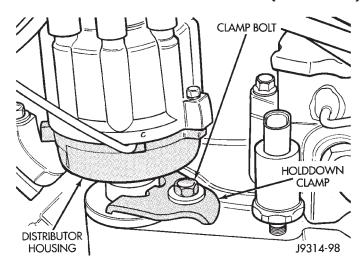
Distributor Holddown Clamp—5.2L Engines INSTALLATION
